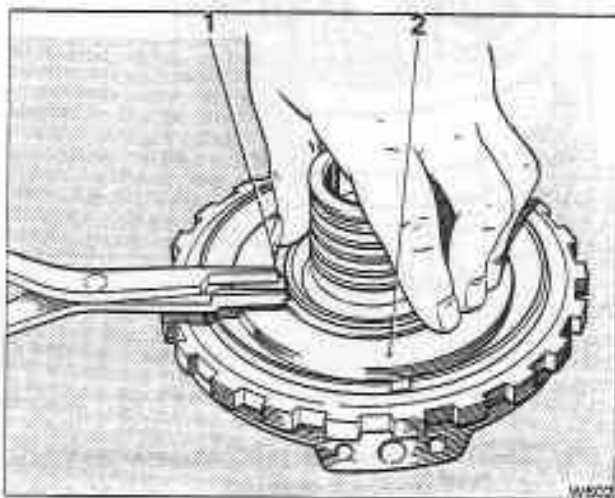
Removing and fitting the intermediate clutch piston snap ring
